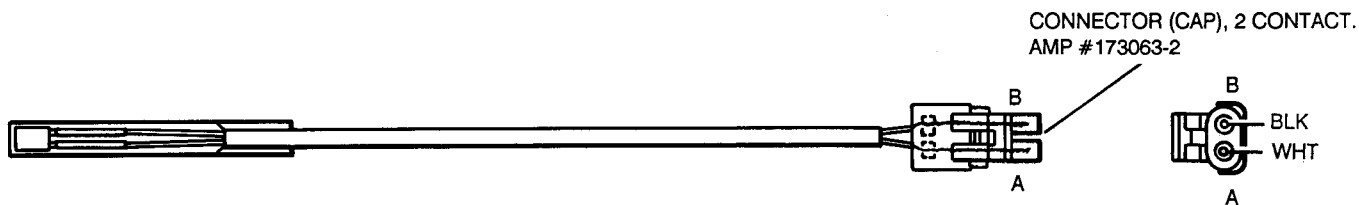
TEMPERATURE SENSOR – YORK PART NO. 025-28956-000
